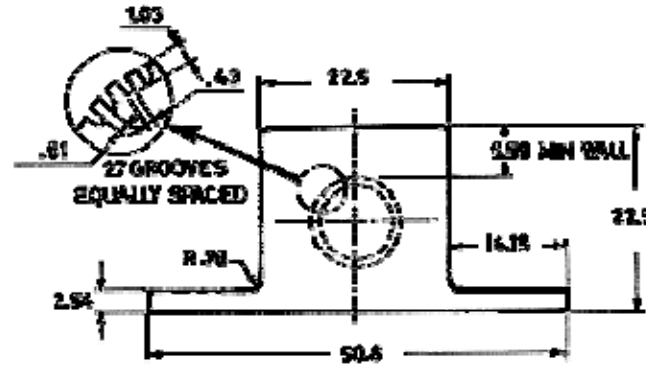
Distributor heat pipe geometry. All dimensions are in mm. From Wright (1980) [21].
